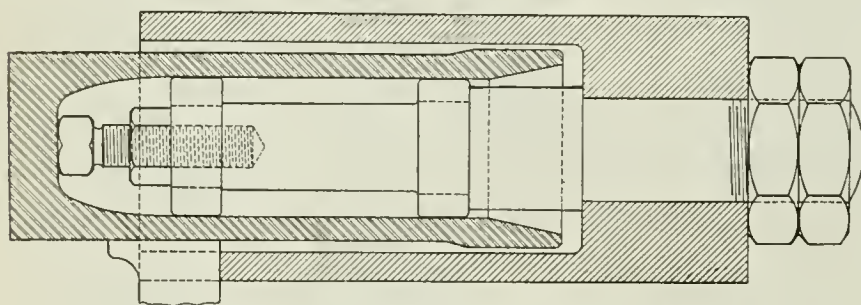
SPECIAL CHUCKING DEVICE FOR "HALL" CUTTING-OFF MACHINE.
